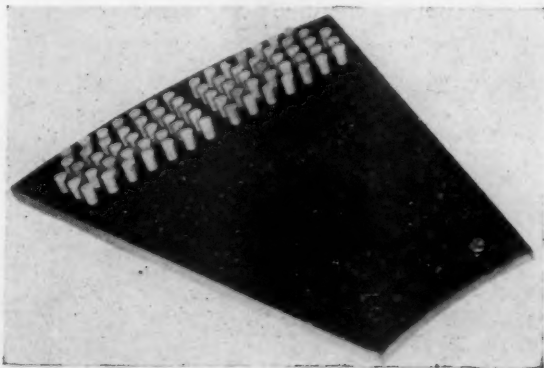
PATTERN FOR PUG-MILL BOTTOM PLATES SHOWING PART OF CORES SET UP AS USED FOR GREEN SAND MOLDING.
